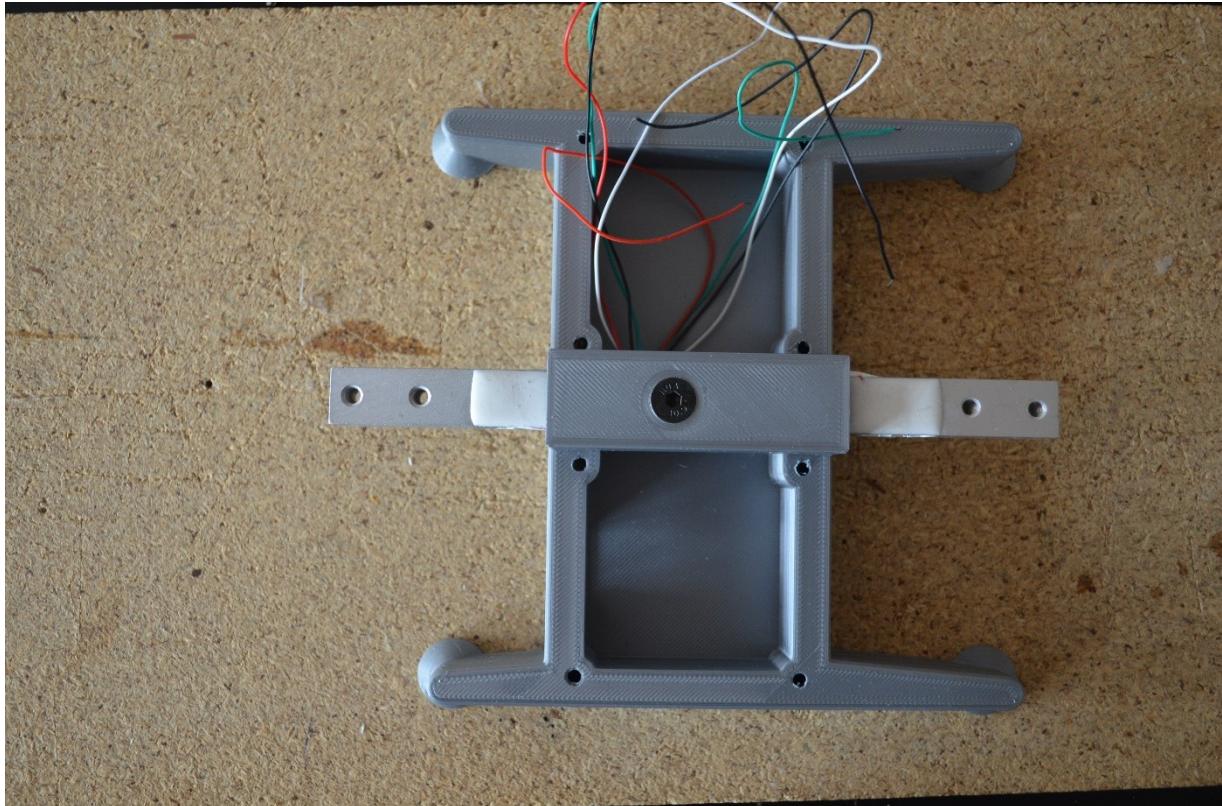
Step 2 – Gauges cap Installation using a HEX M5 x 8 mm flat head screw.
